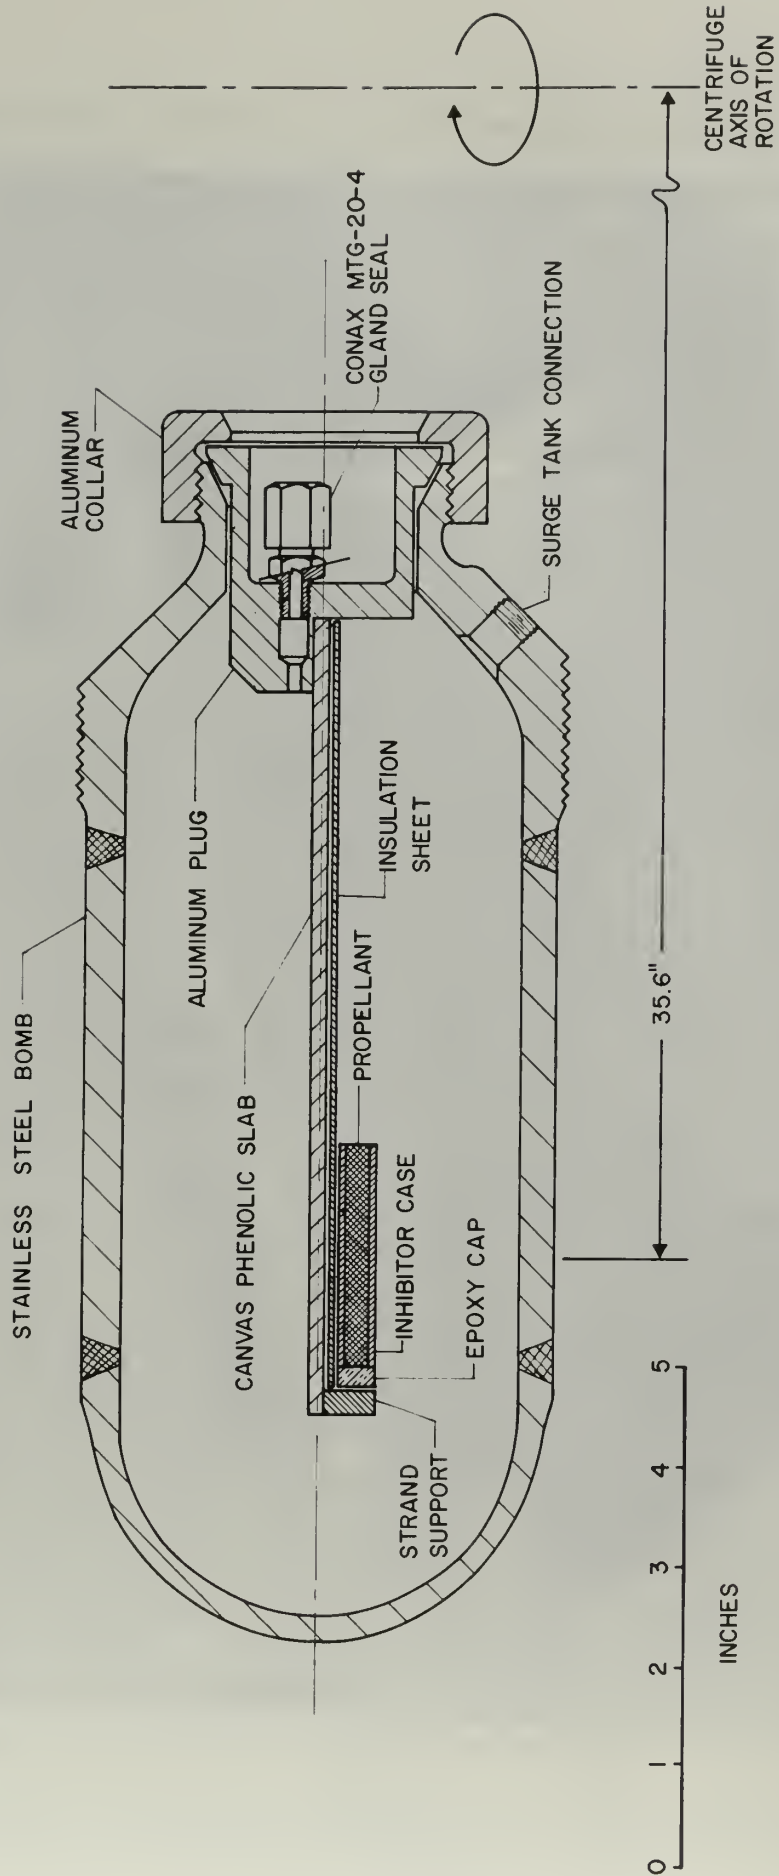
STRAND HOLDER AND BOMB ASSEMBLY
